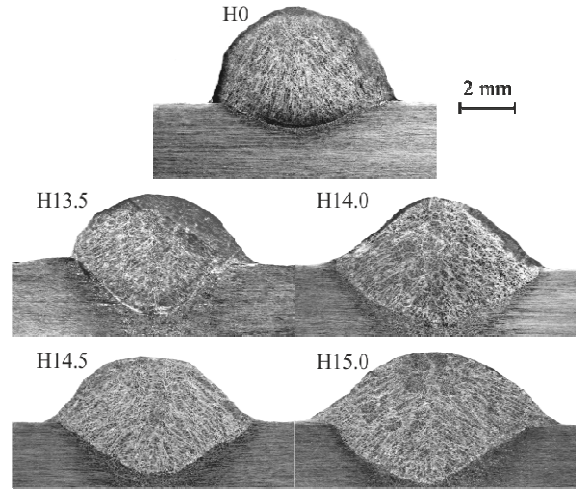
Macro images of the etched cross sections of the welded specimens
